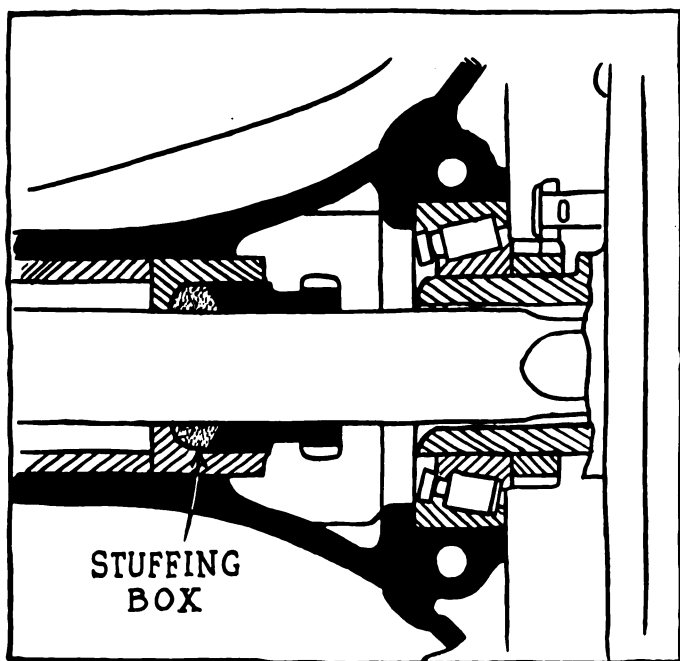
Installation of felt or hemp packing box at inner end of drive axle
